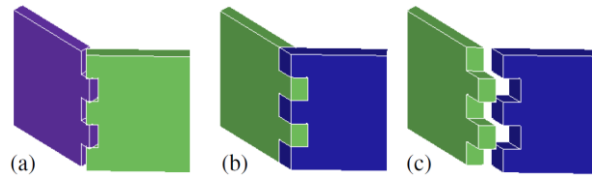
(a) Finger joints of a watertight structure achieved in [6]. (b) Bevel joints of a seamless structure. (c) An exploded view of the bevel joints in (b).
